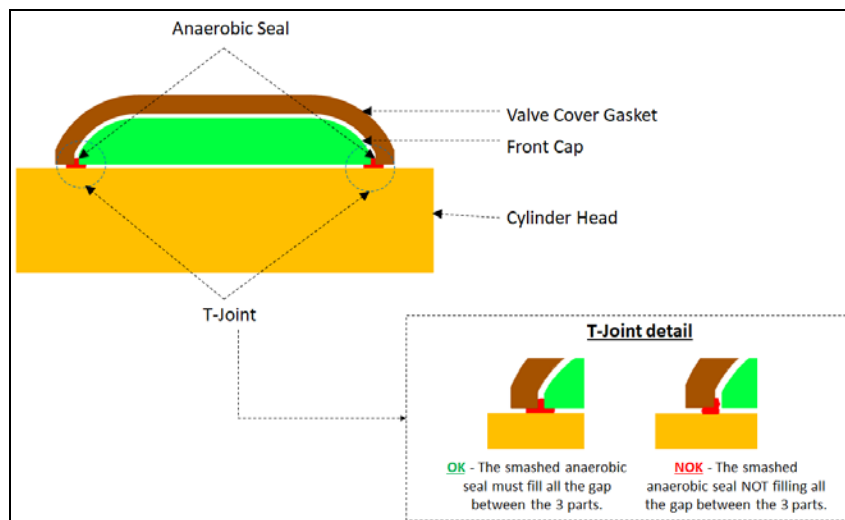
Schematic drawing illustrating the “T-joint” between cylinder head, front cap and valve cover gasket (Author, 2018).
